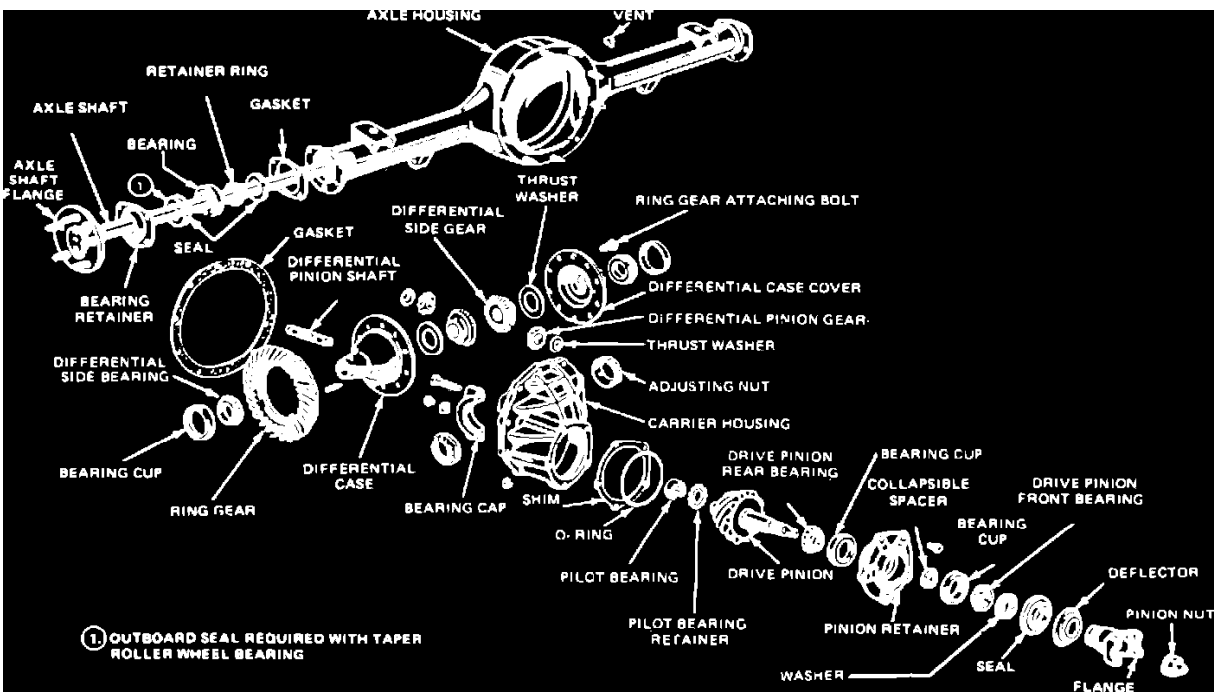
Removable Carrier 9In. Ring Gear Axle Exploded View
